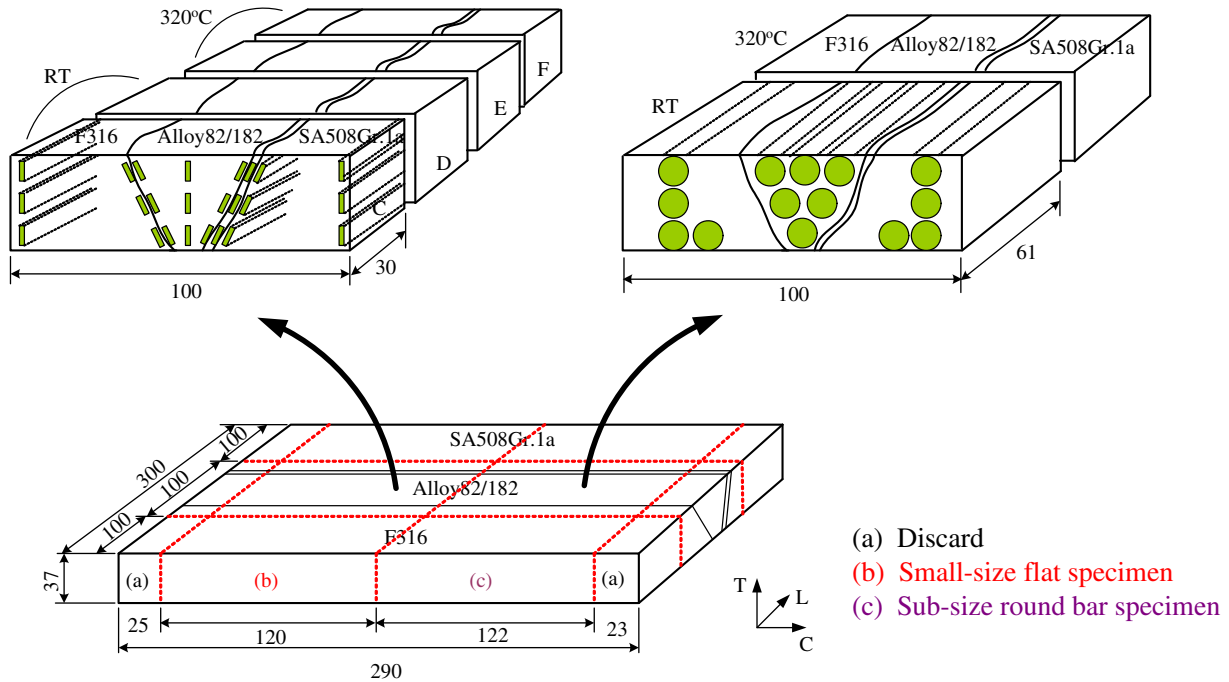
Schematic descriptions of the specimen extraction from the weld joint.
